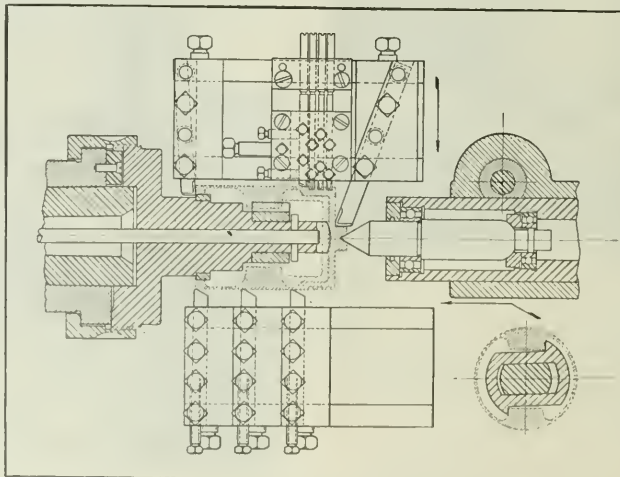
Finish-turning, grooving and facing the Piston with Tooling Similar to that shown in Fig. 13
